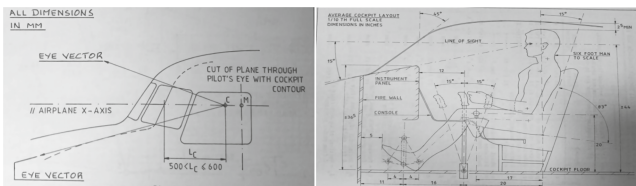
(a) Center of vision (b) dimension of seat arrangement [5]
